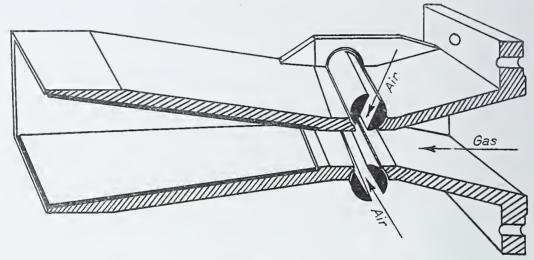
THE HUNTER BLAST FURNACE GAS BURNER.
